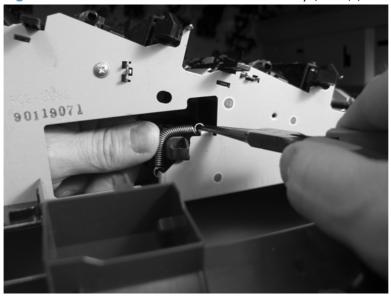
Remove the laser/scanner assembly (C/Bk) (3 of 5)
